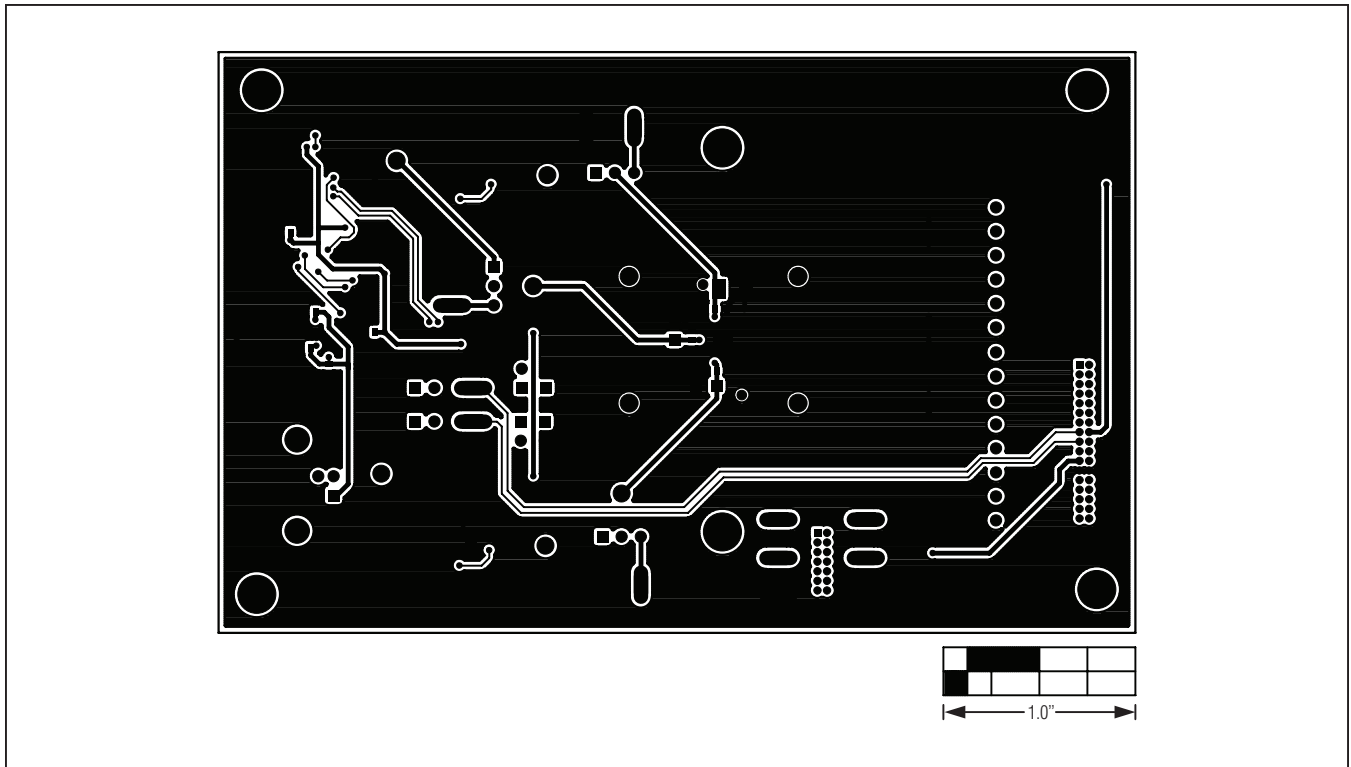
MAX9599 EV Kit PCB Layout—Solder Side
